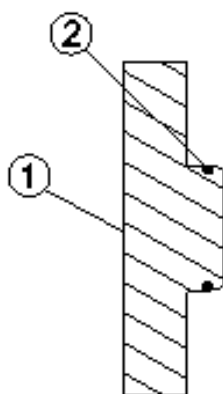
BLIND UNIMOUNTING DISCHARGE FLANGE ASSEMBLY
